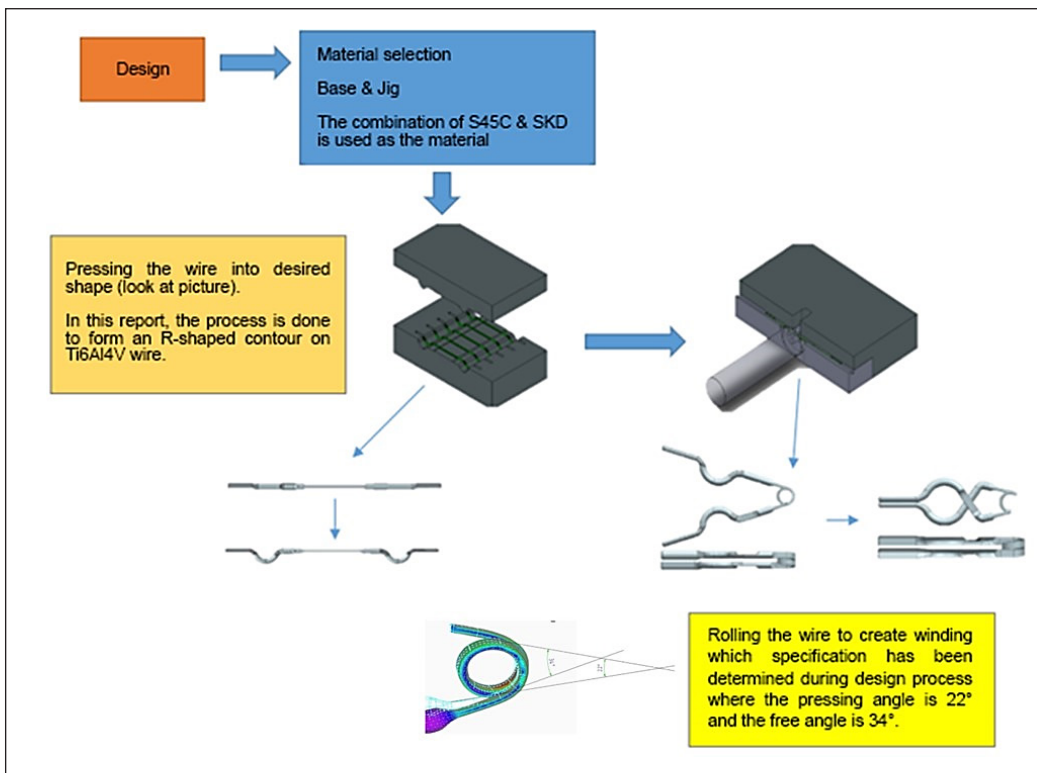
Metal forming diagram to reproduce the Ti6Al4V aneurysm clip. From the design of the aneurysm clip, we chose a material and formed the wire with customized moulding. The wire is pressed to form an R-shaped contour. The pressed wire is then rolled with determined angles of 22° and 34° before being bent 90° into an L-shaped
